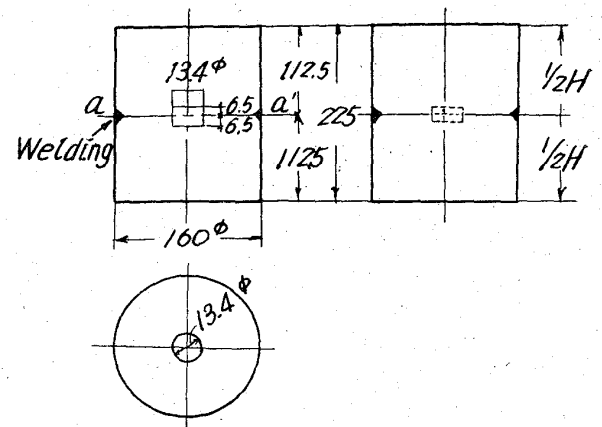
Shape and dimensions of A-specimen made of steel steel in mm.
